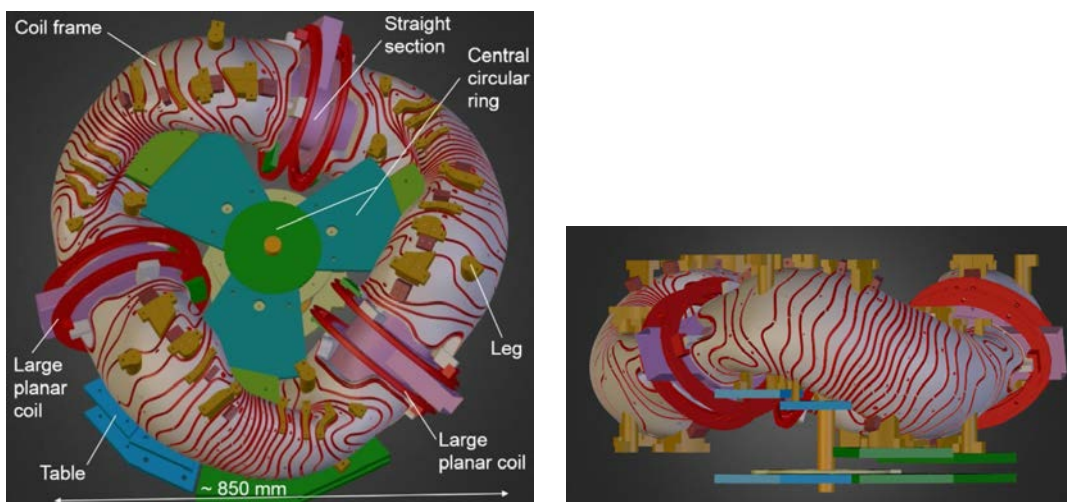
Plan and elevation view of UST_2. It will be manufactured by the researched construction methods.
